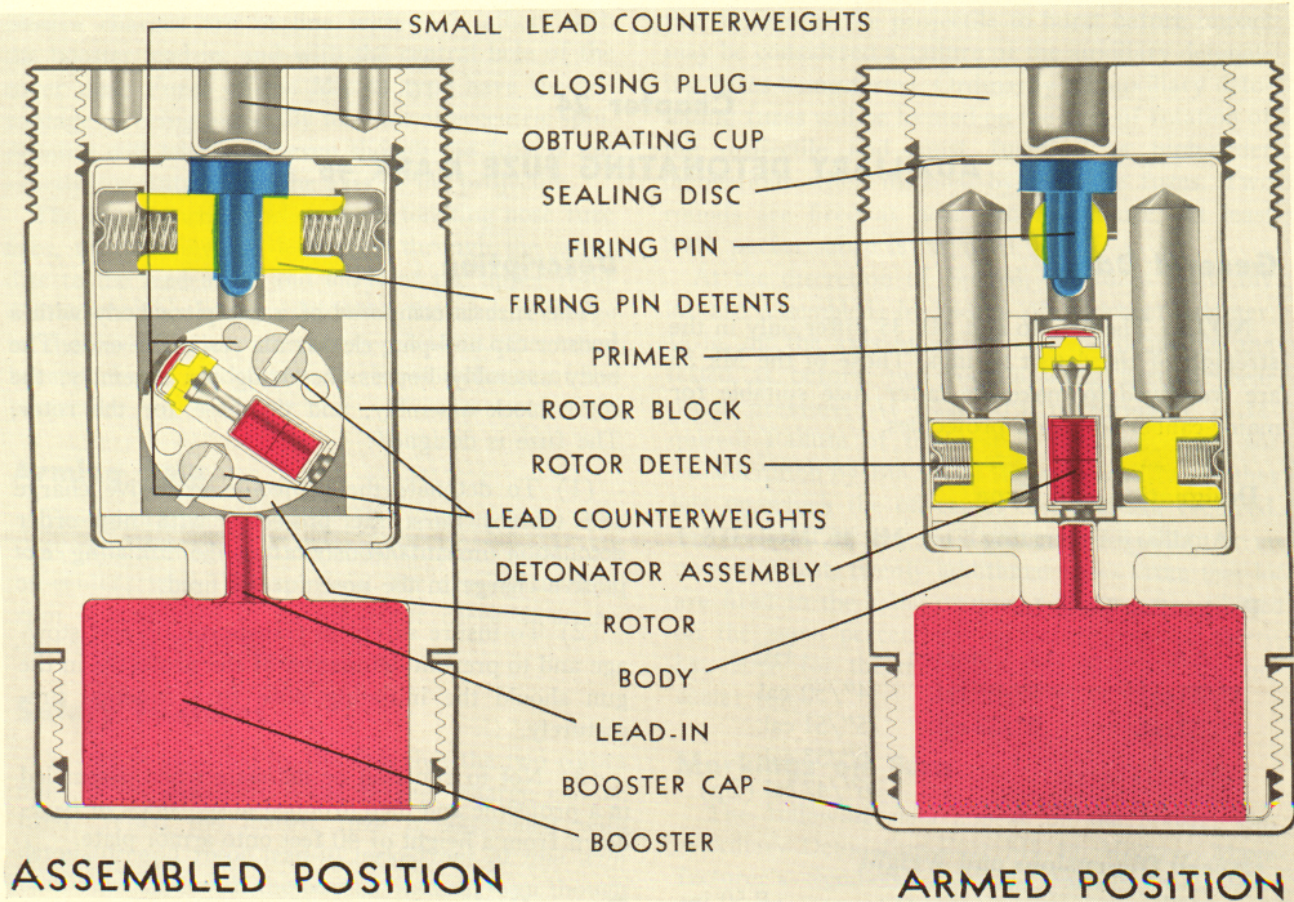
Auxiliary Detonating Fuze Mk 46—Sectional View
